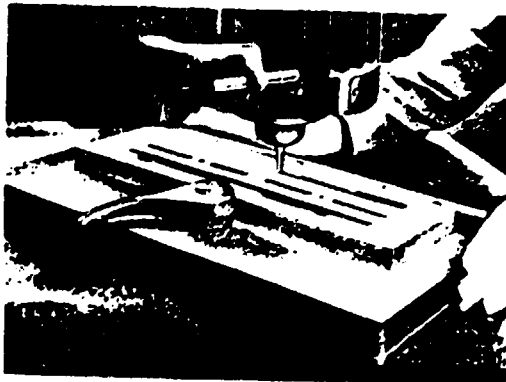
shows a routing jig for a complicated workpiece with holes at different routing depths. A jig for decorative grooving of solid wood panels is shown in Fig. 34. The jig consists of a rectangular plywood base with a straight wooden guide on each side. The base is clamped on a router table. The work piece is fed around the inside faces of the guides by keeping it constantly in contact with one of the four guides.
